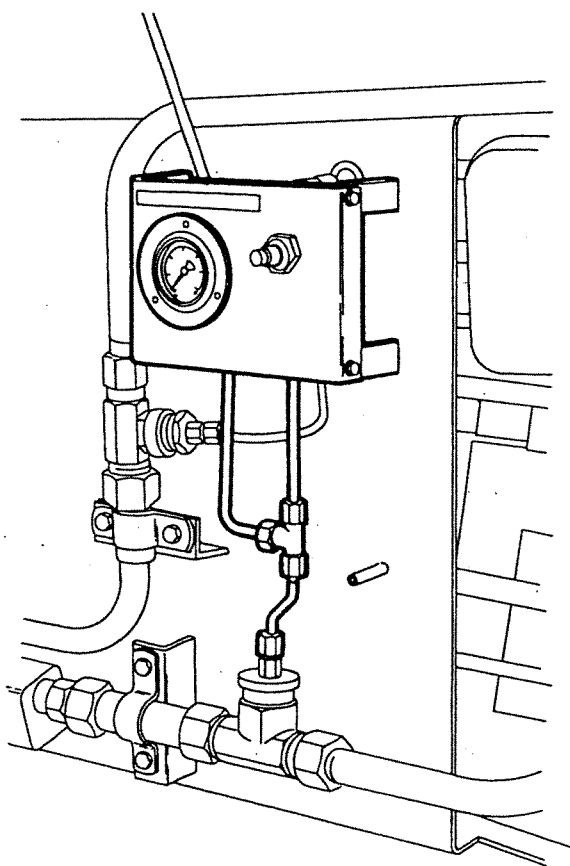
Bow Thruster Hydraulic Pressure Gage
